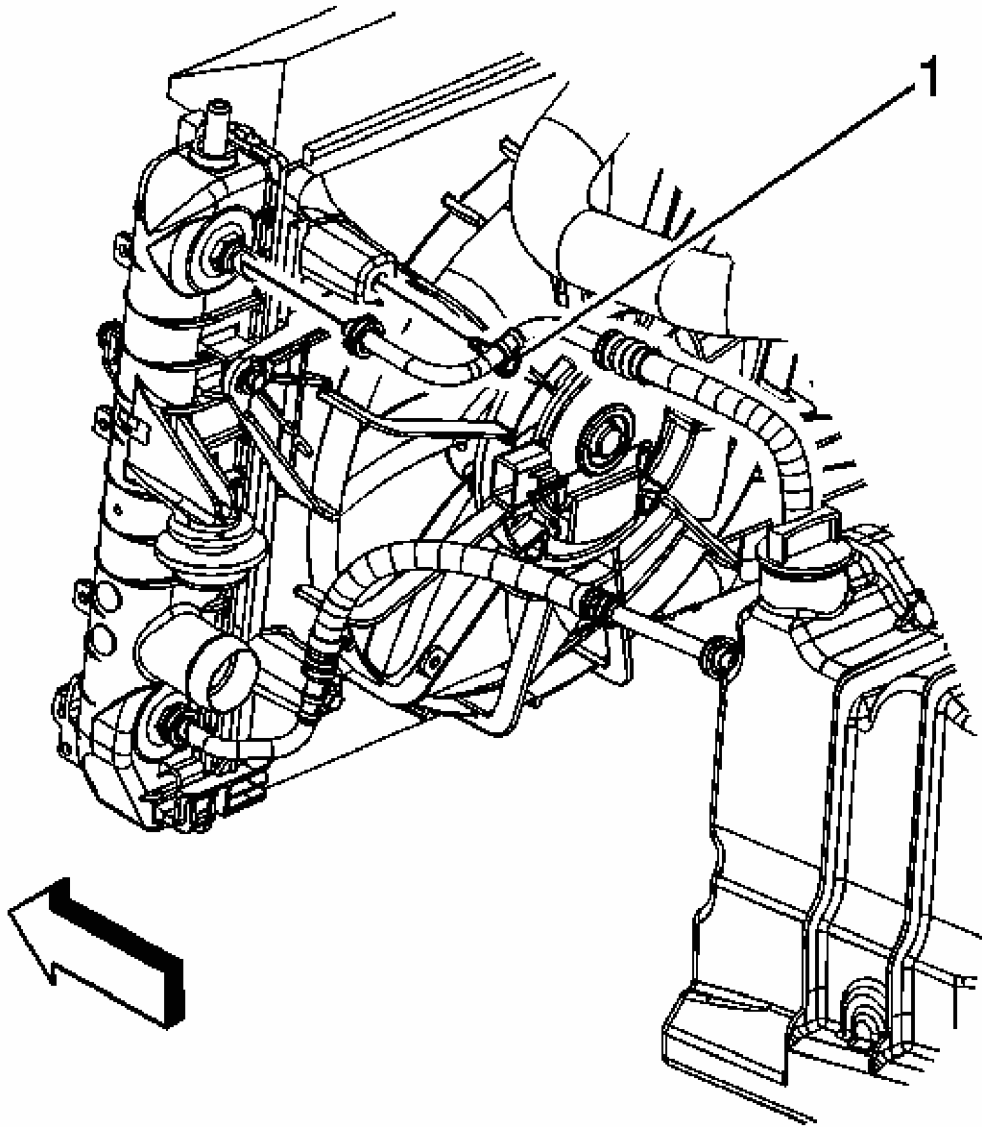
Identifying Upper Transaxle Oil Cooler Pipe Bolt & Bolt
